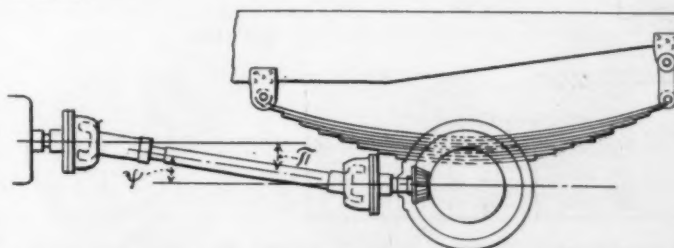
APPLICATION OF PROPELLER-SHAFT AND UNIVERSAL-JOINTS WITH HOTCHKISS DRIVE
